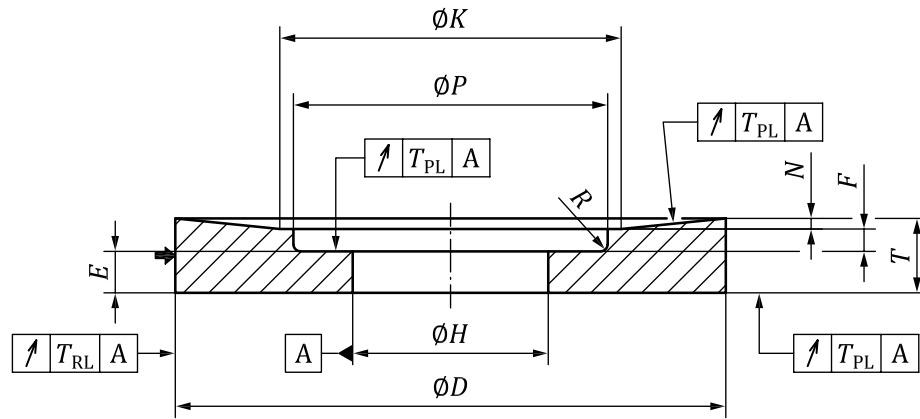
Grinding wheel, relieved and recessed on one side (Type 23)
